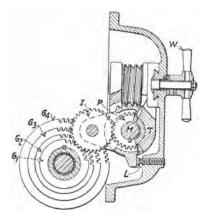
Section through tumbler gear unit, Cincinnati milling machine. M is the main driving shaft, see Fig. 149. The swinging frame carrying the tumbler gear I moves up or down on the trunnions T and is operated by the pilot wheel W through the worm and worm wheel. The pilot wheel serves also as a handle to move the tumbler frame laterally to bring the gear I over G1, G2, G3, G4, as desired and then a part of a turn of the wheel to the right engages the gears. For each of the four positions of the tumbler gear, the lug L on the frame abuts against a suitable stop pin to insure proper meshing of the gears.
